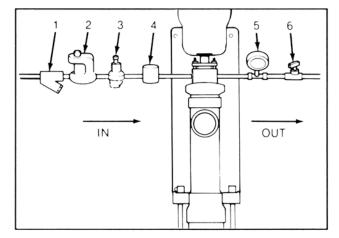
Typical water flush arrangement includes strainer valve (1), sight flow indicator (2), pressure regulating valve (3), solenoid valve (4), pressure gauge (5) and needle valve (6).
